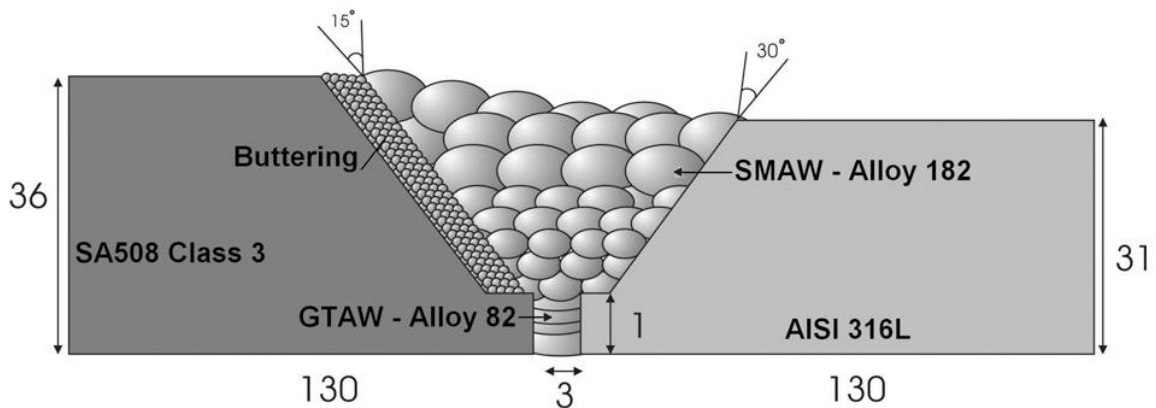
Schematic of the weld design (dimensions in mm).
